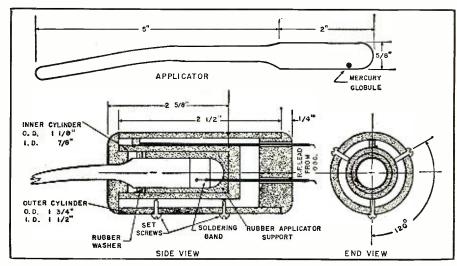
Mechanical details of probe housing. This housing is used as the handle and may take any suitable form the builder finds convenient for his purposes.
